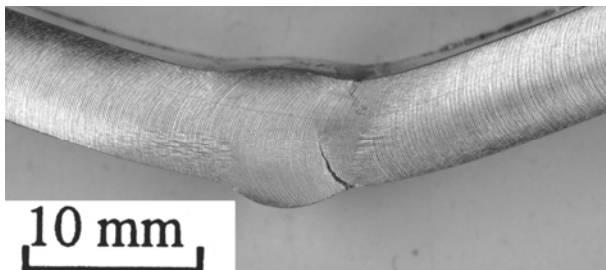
Bending Test of AA 2219 TIG Weld
